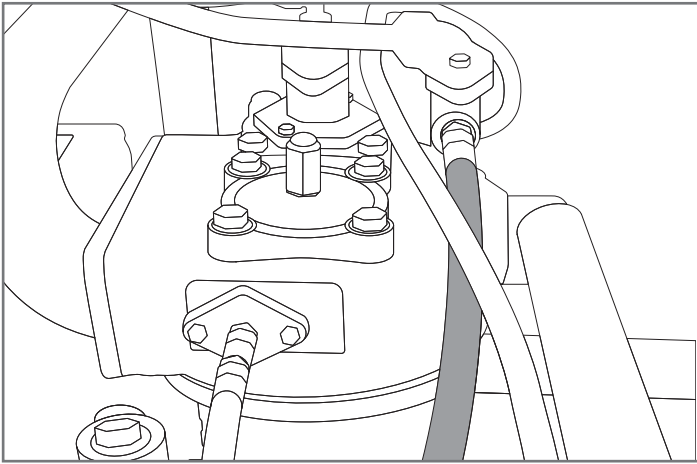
Coolant return hose (1/2 inch inner diameter) as installed on locomotive compressor. If a connection to the compressor cannot be made, utilize an alternative connection to the expansion tank.
